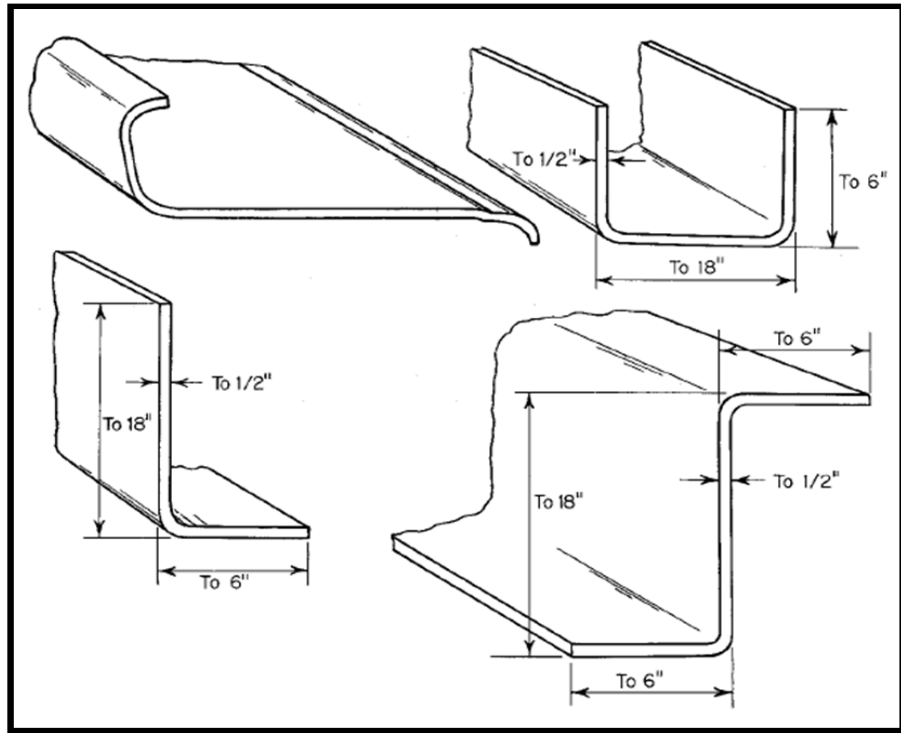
Size Ranges of Typical Roll-Formed Structural Shapes
